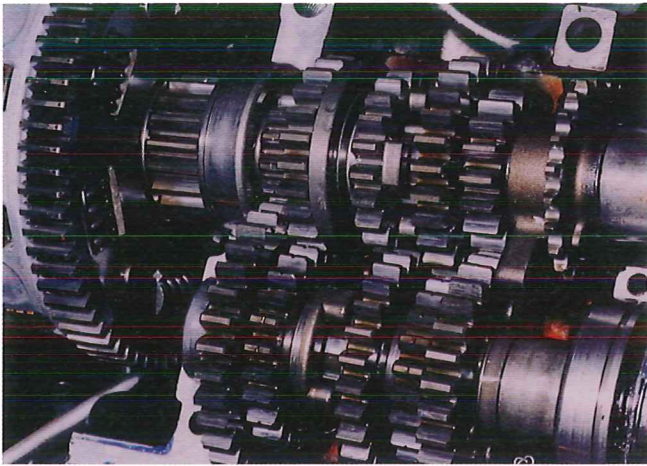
Gear assemblies are commonly used by machinery to transmit motion.
